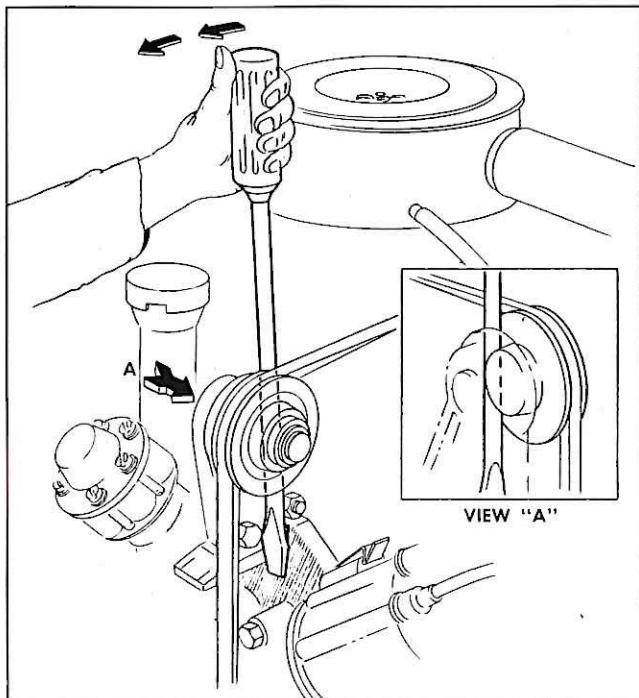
Screwdriver Position for Adjusting Blower Belt Tension
